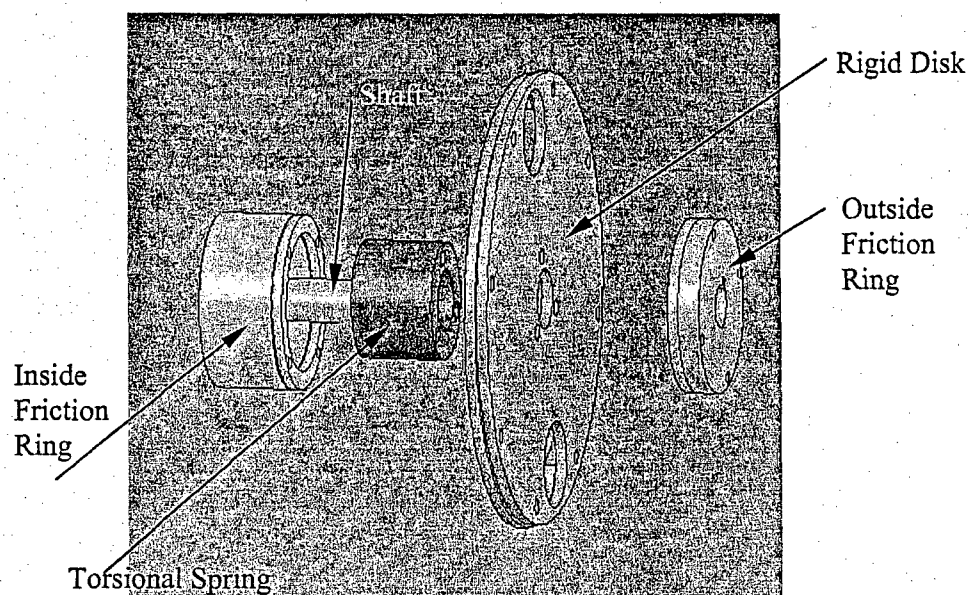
Exploded view of the disk, spring, and friction ring system.
